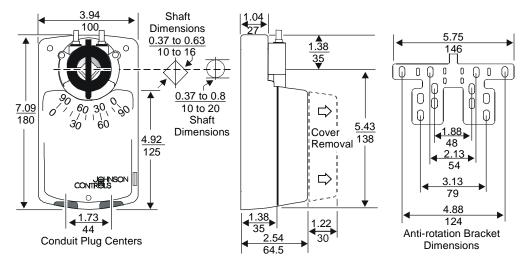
Actuator and Anti-rotation Bracket Dimensions, in. (mm)
